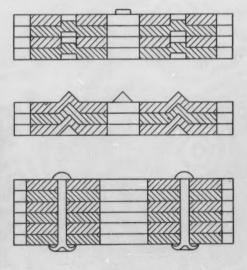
Below—In laminated construction, half extrusions, dimples or dowel pins assure tooth alignment. Joining is usually by rivets, welding or brazing.
